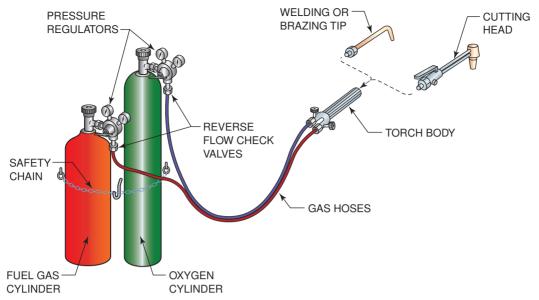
Oxyfuel welding and cutting equipment.
